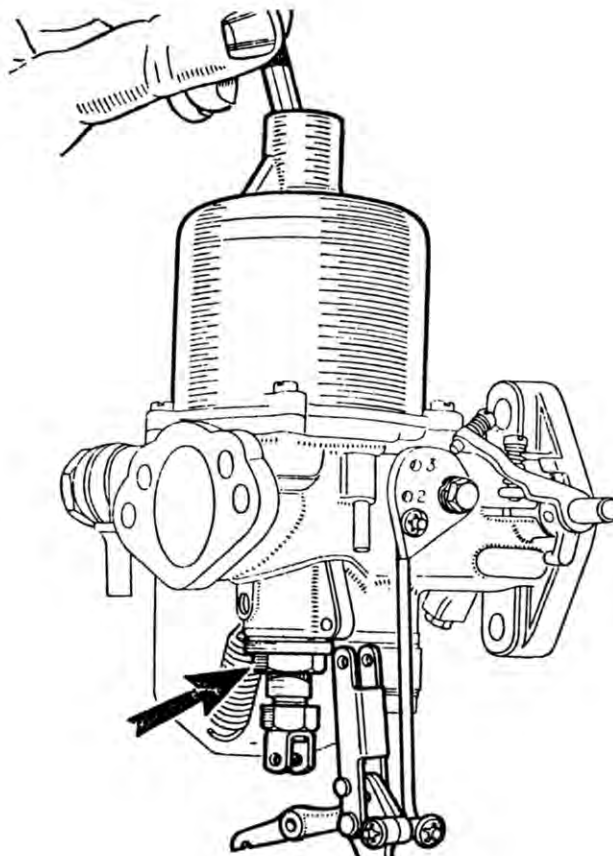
To center jet, loosen lock screw at arrow & wiggle jet assembly while pushing down on piston. Keep jet head tight against jet nut.
